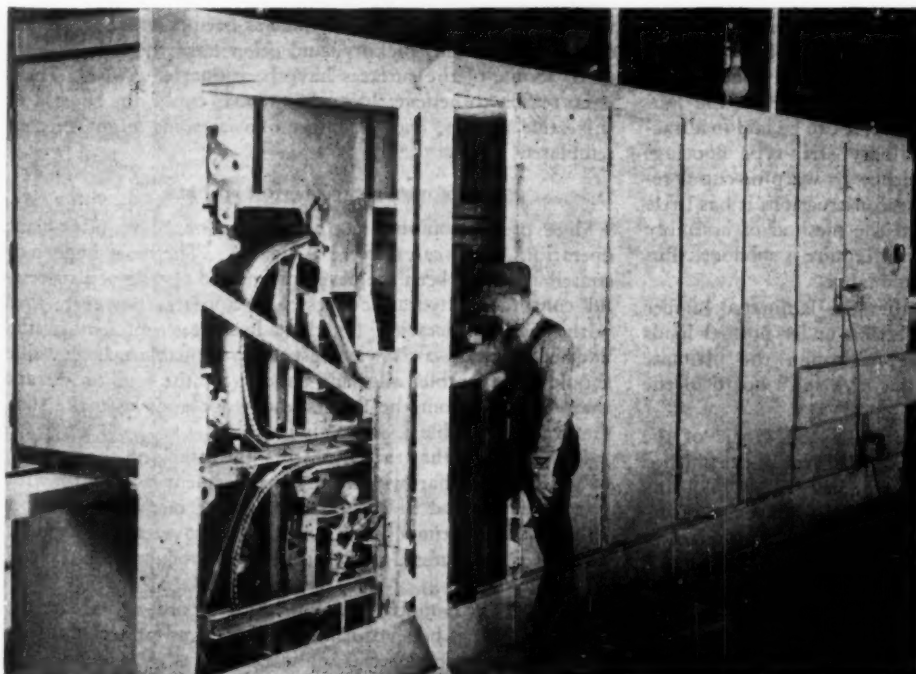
CONTINUOUS HYDRAULIC PRESS WITH INSPECTION DOORS OPEN TO VIEW MECHANISM OF DISCHARGE END
